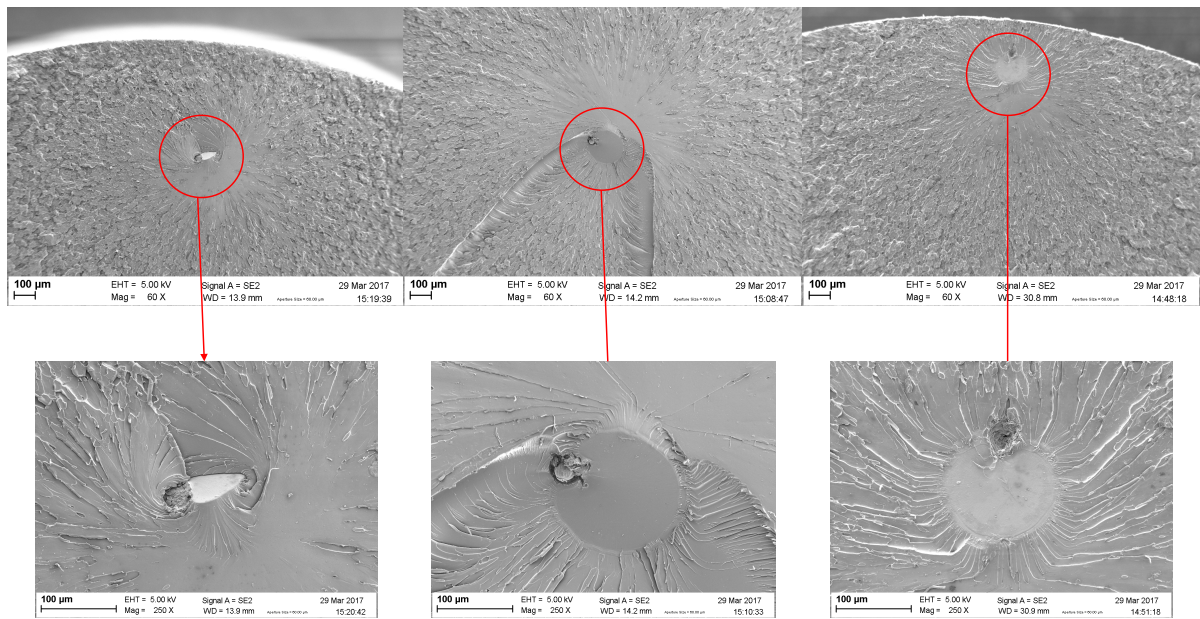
Fracture surfaces of the specimens broken under quasi static loading with a zoom on the initiation of the fracture. From left to right: sample 1 static, sample 2 static and sample 3 static.
